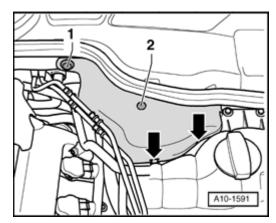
Removing/Installing Sealing Flanges For Camshaft Adjuster On Left/Right Covers For Timing Chain
